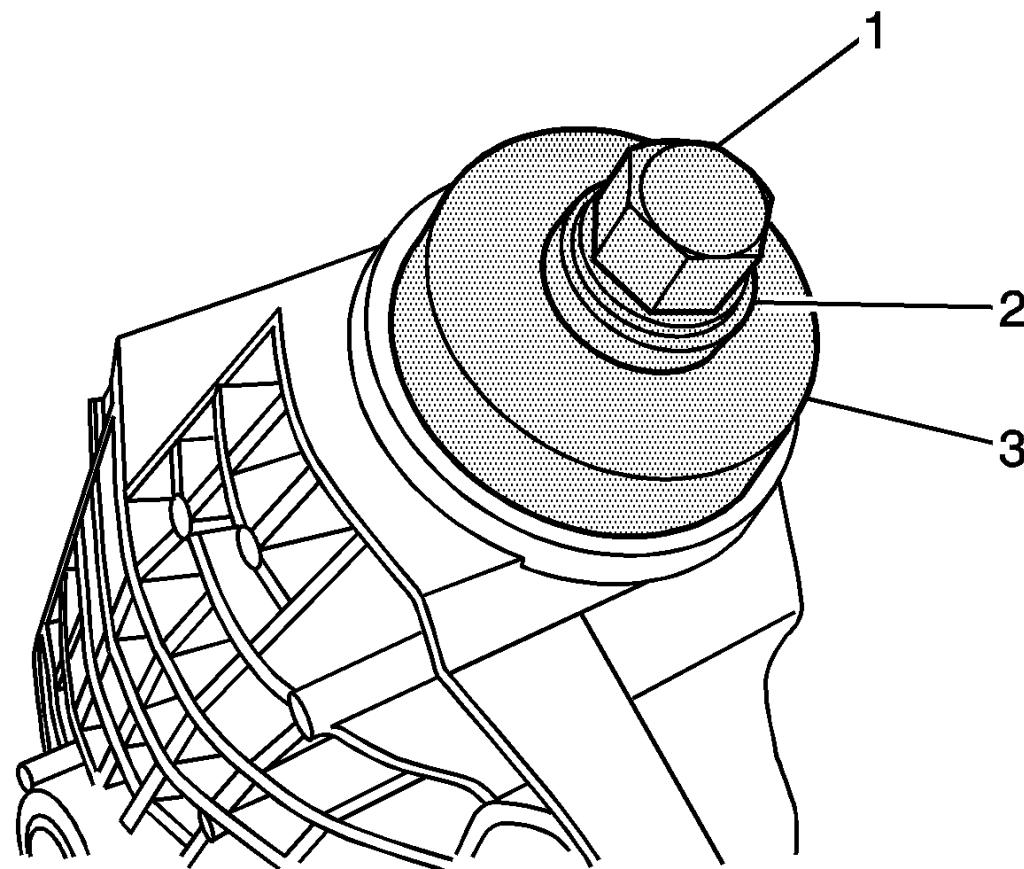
View Of Thrust Bearing & Washer, Forcing Screw & Special Tool J 45858-3
